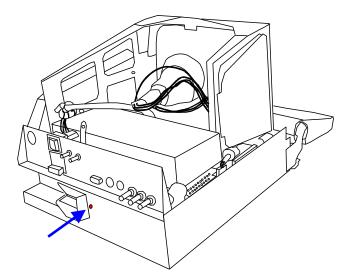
1-17. Screw holding the Front-End/Delay board
